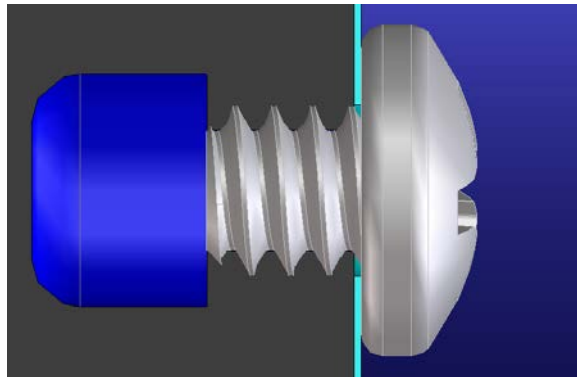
Side mount OEM hole, 6-32UNC x 1/8" (3.8 threads engagement)
